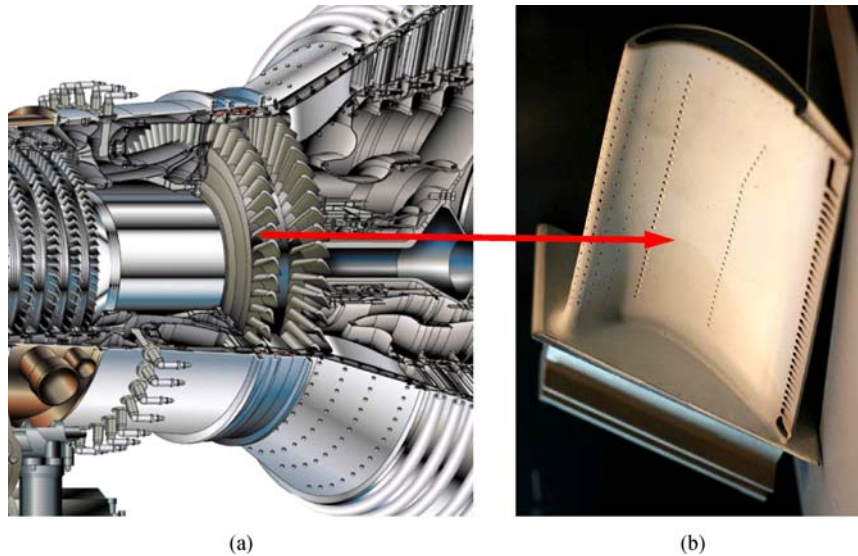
(a) High-pressure turbine rotor assembled with (b) SC blades
